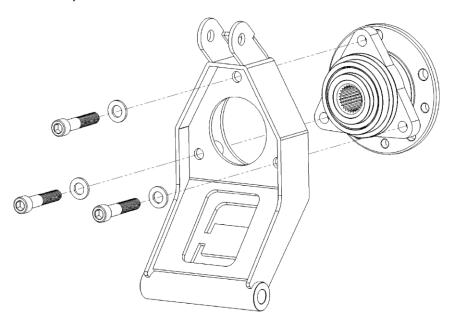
Install the hub as shown. Tighten the bolts in a spiral sequence to pull the hub in evenly.
